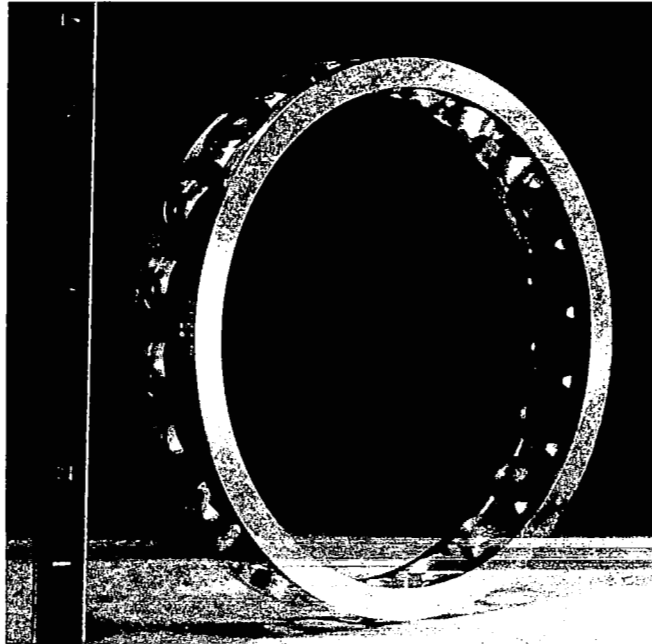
Overall View of Typical Solid-Ball Cage – Baseline Bearing S/N 2528A-1
